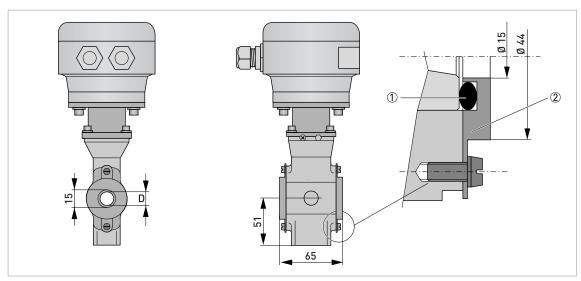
Construction details DN2.5...15 / 1/10...1/2"
